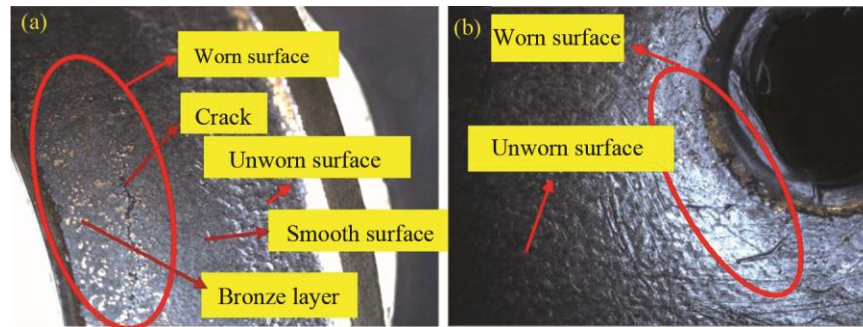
PTFE-bearing after life-wear tests a) lower and b) upper bearings.
